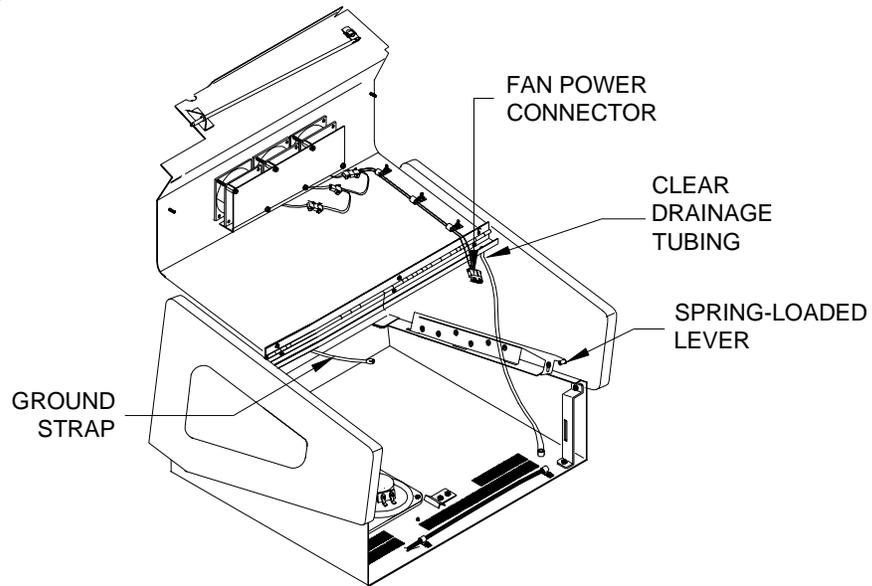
BLUE MAXX/MAXX CLASSIC - HOOD ASSEMBLY
